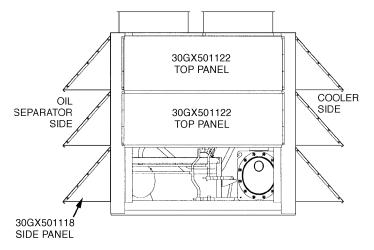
End View (30GX, 30GXN,R080-150, 160 Shown)
